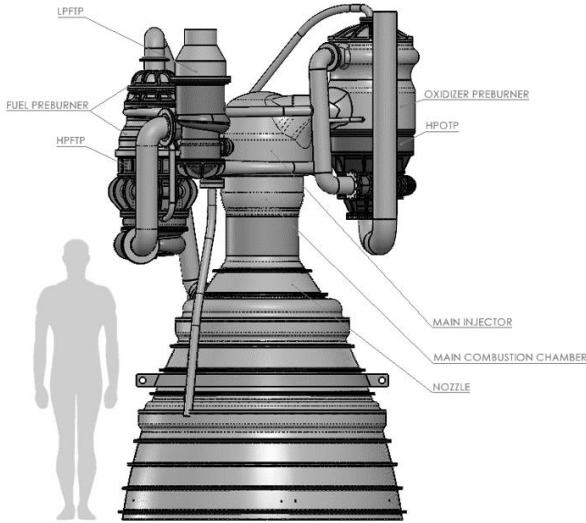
SLME integrated power pack side view with nozzle $\epsilon=33$.
